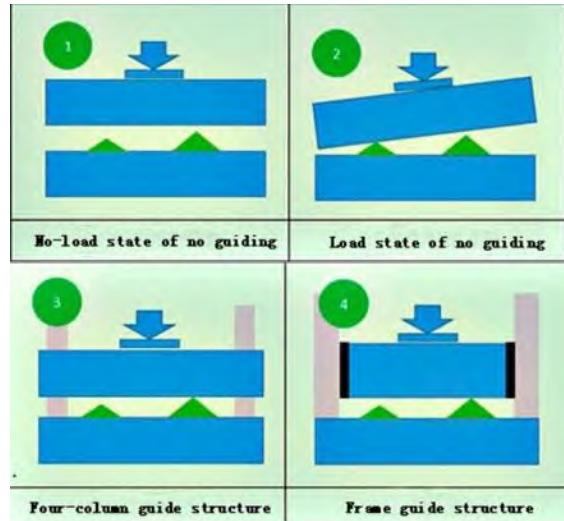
Loading types in hydraulic presses: no guiding, four-column and frame structure [15].
